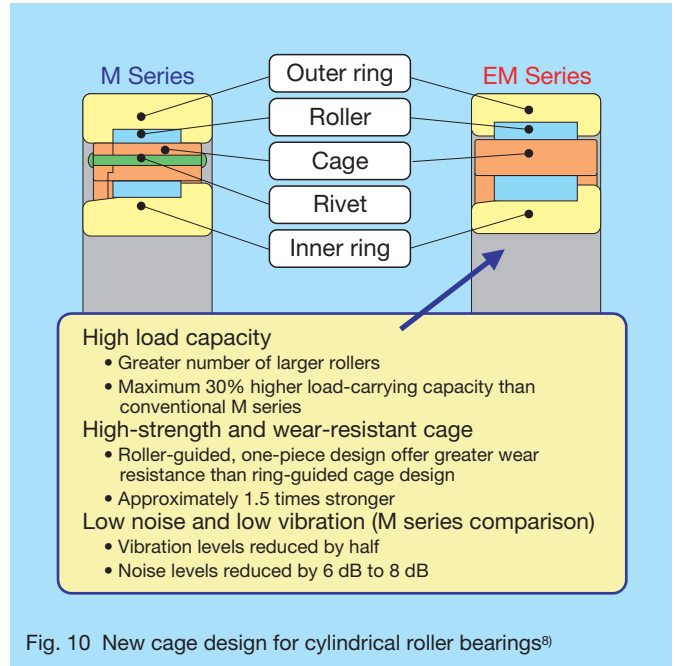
New cage design for cylindrical roller bearings⁹⁾
